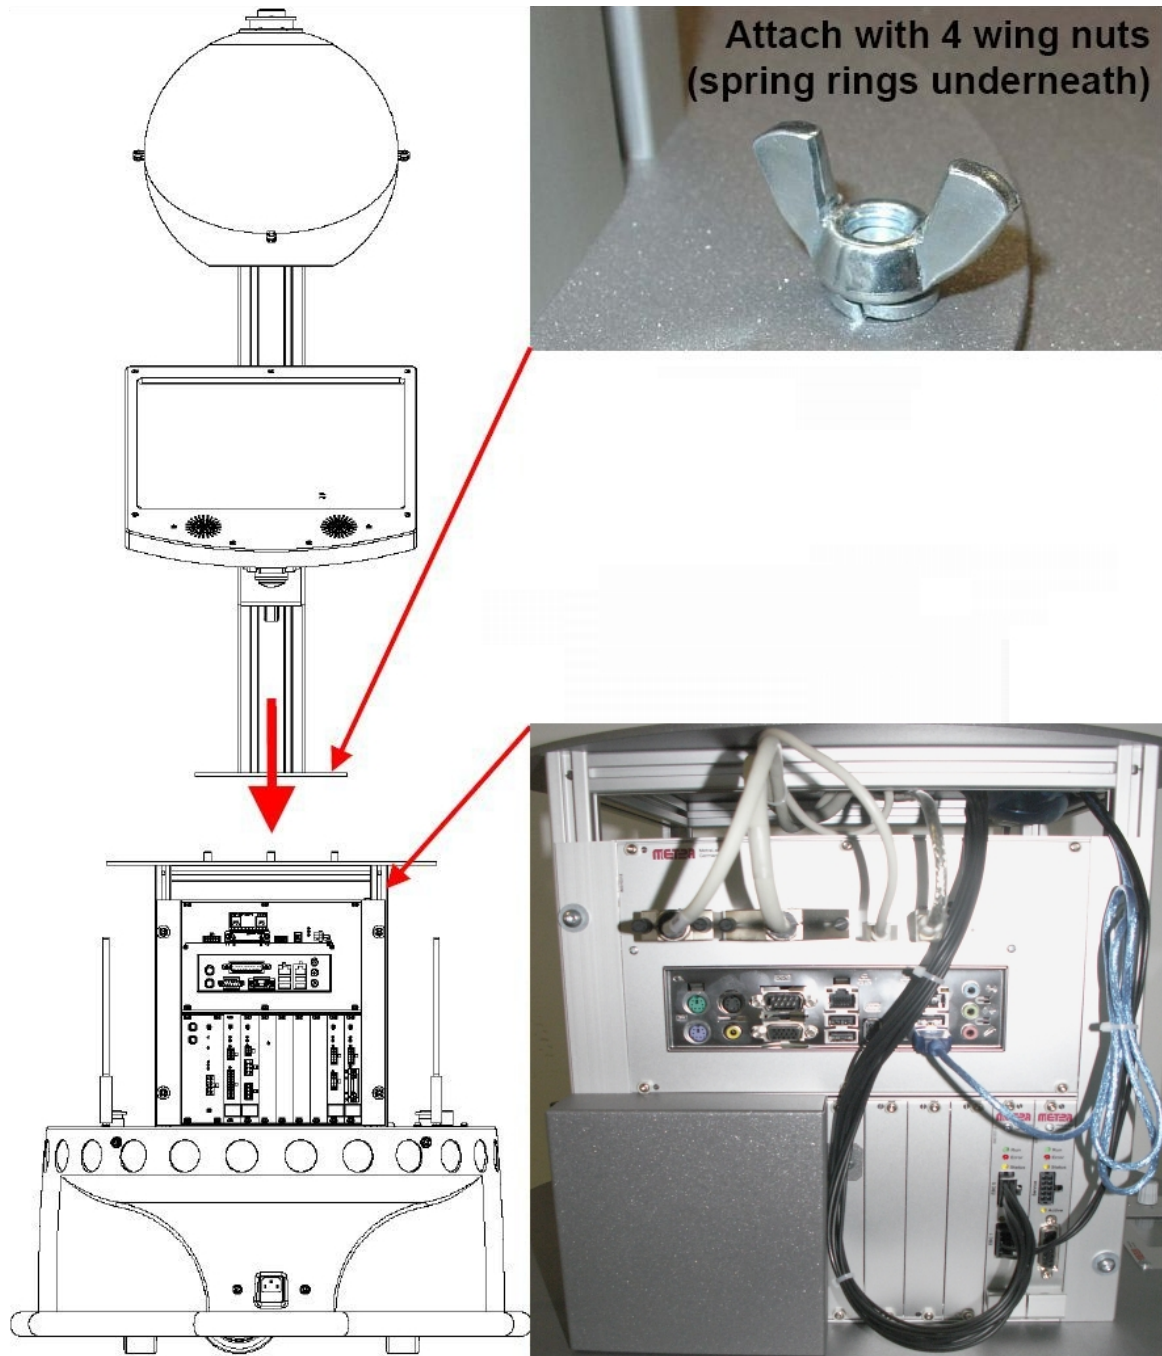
Assembly of the SCITOS G5 Human-Machine-Interface.
